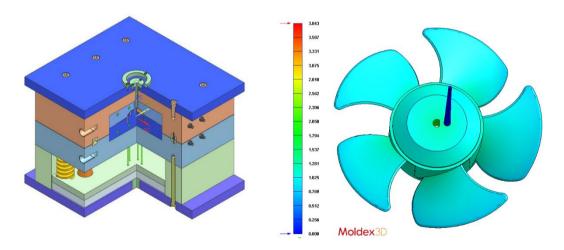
Mold of plastic injection mold and surface depression defect of 5-blade fan detail
